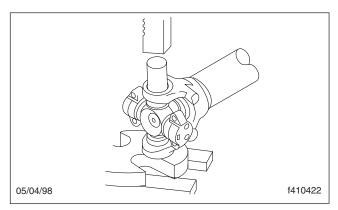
, Installing Bearing Cups, RPL Series U-Joint
